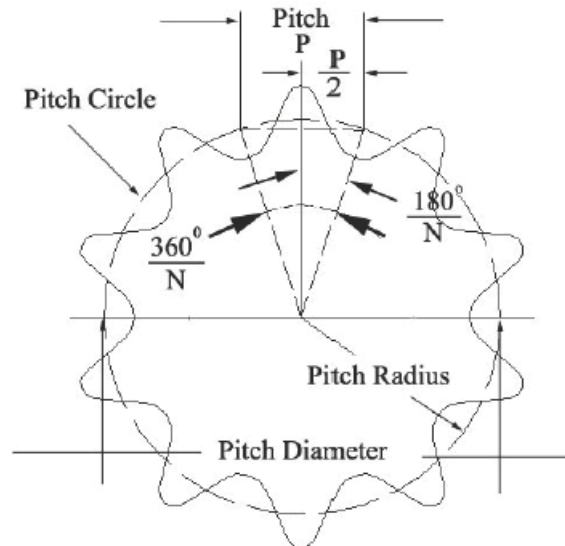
Mechanical specifications of the driving belt track gear [2].
